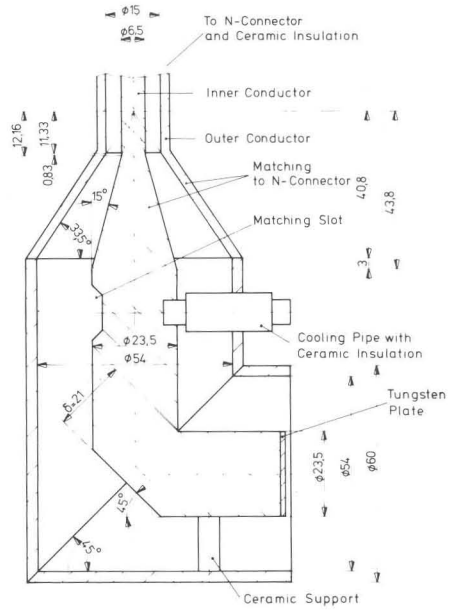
Design of coaxial Faraday cup (dimensions in mm)
